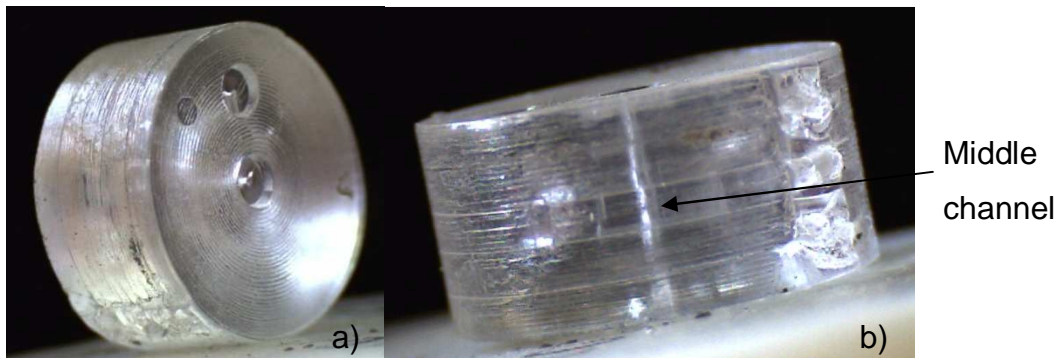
Oven bonded sample, a) top view and b) view from side
